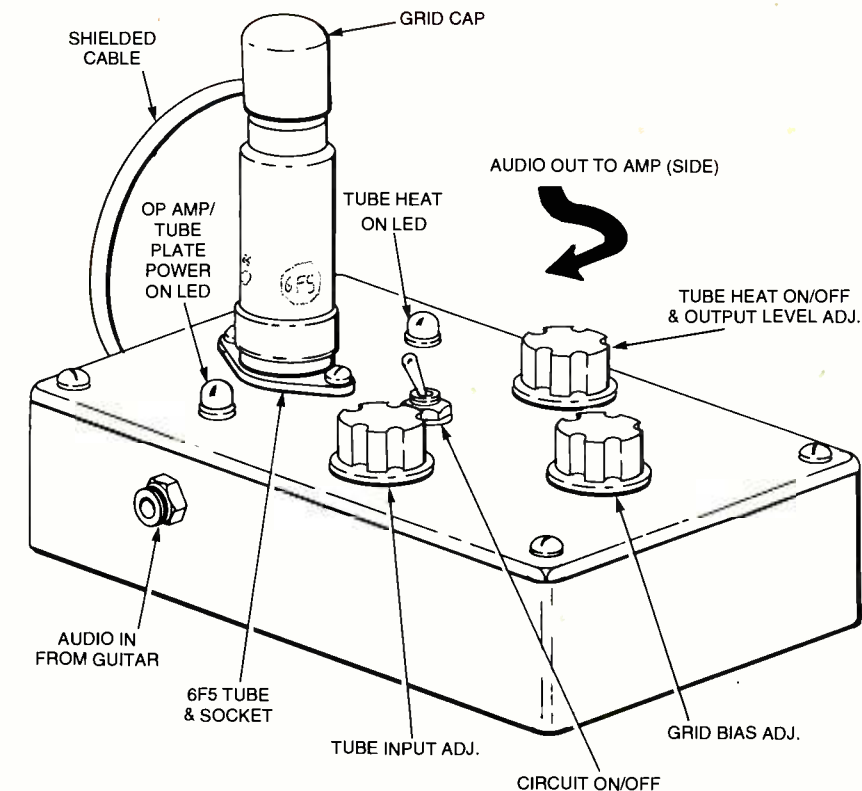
A diagram of the completed Tubester project, with suggested layout of pots, tube socket and tube, in/out jacks, LEDs and switches. See the photo for another view. The 6F5 tube gives the project a funky, menacing appearance!
